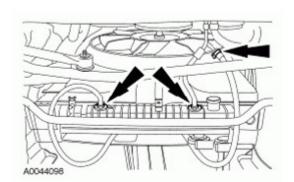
Installing Cooling Fan And Clutch Assembly Courtesy of FORD MOTOR CO.
